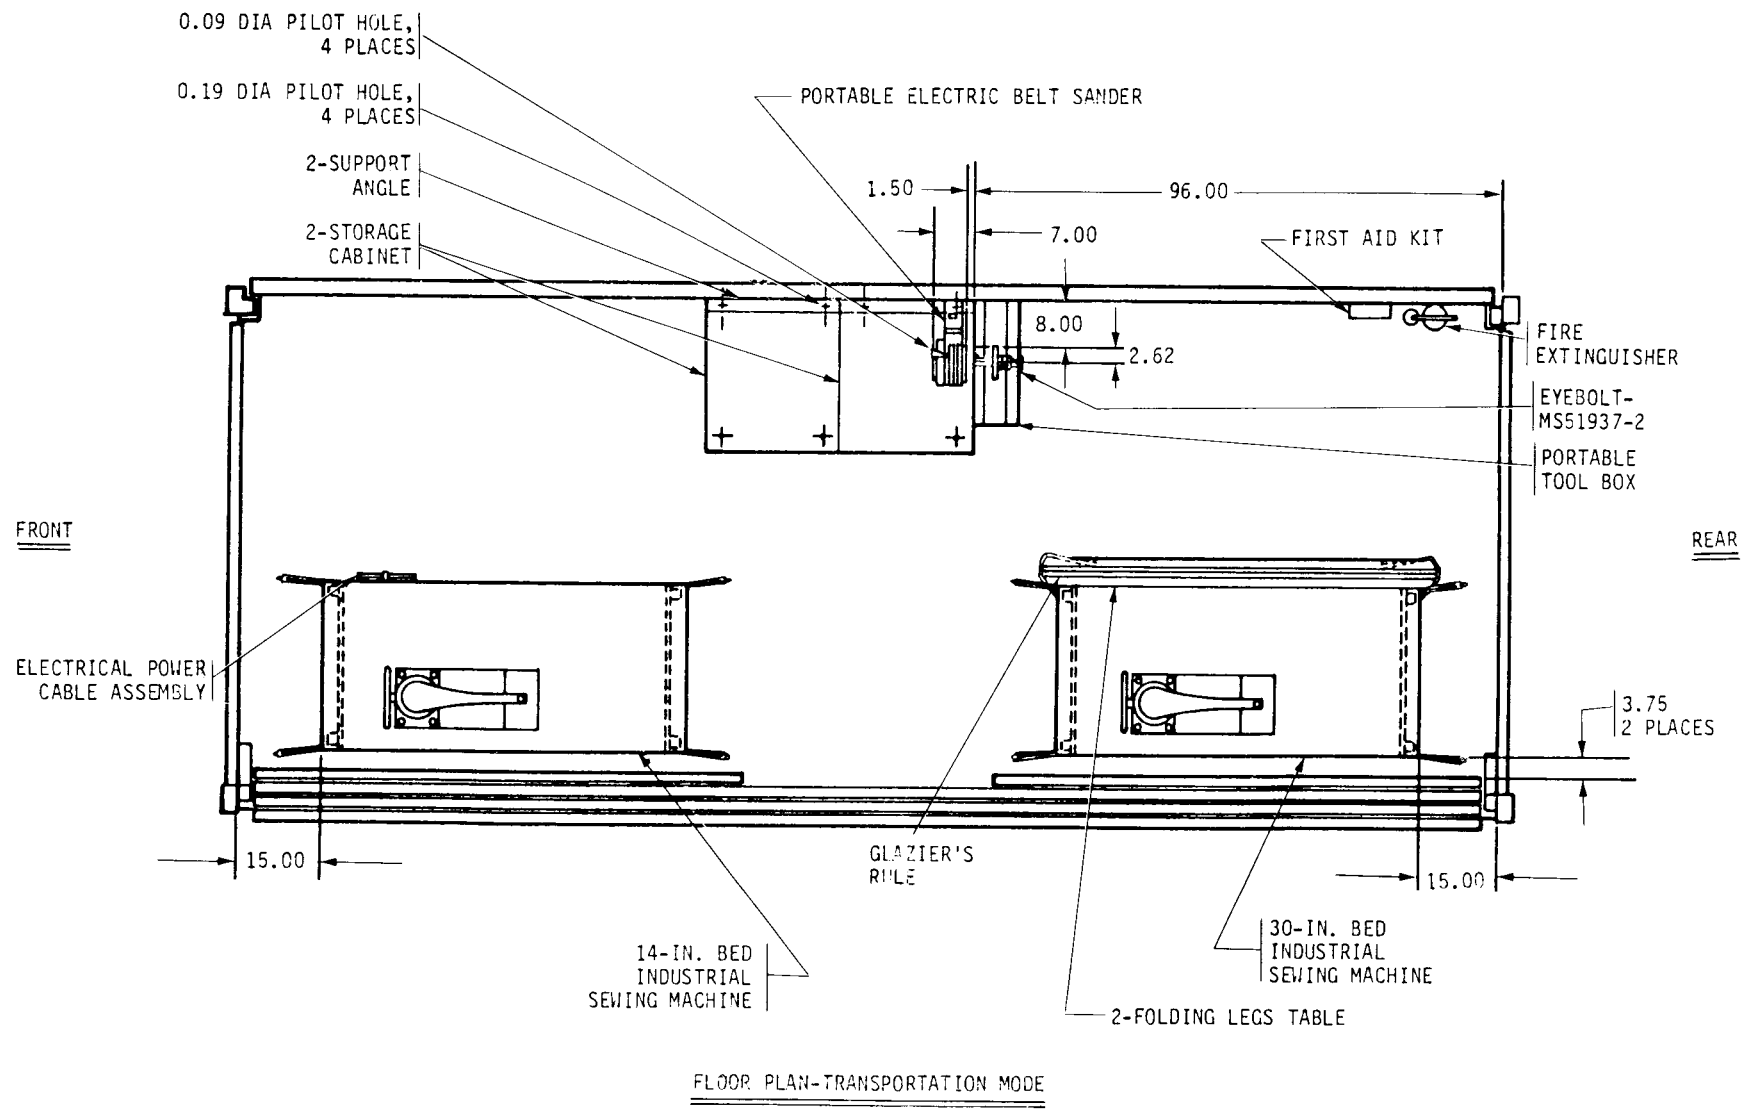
Components to be Mounted, Floor Plan, Unit 2, ISO-2-1.
